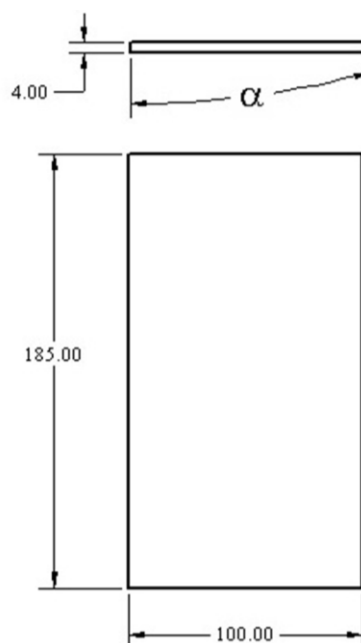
Geometry of the AA6061 plates used in the experiments. Base plate dimensions: 185mm×100mm×4mm.
